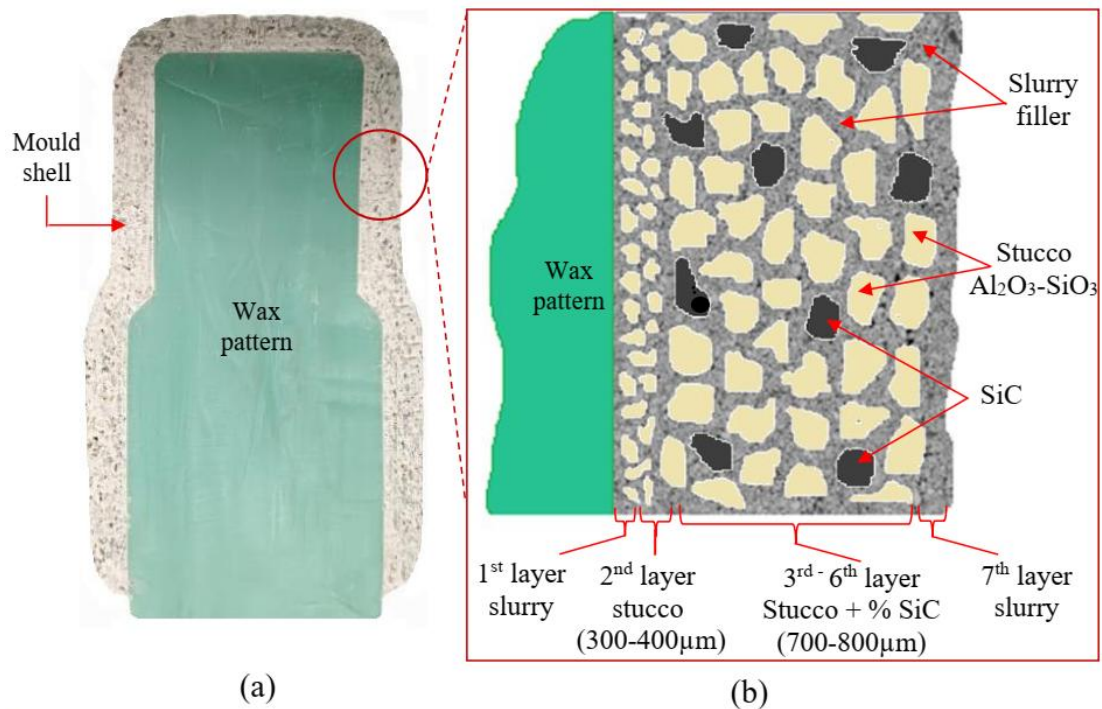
Schematic diagram of (a) ceramic mould cross-section, (b) close-up view of ceramic mould shell layer construction
